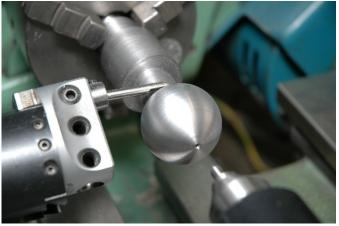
Finishing the Large Ball With Tailstock Withdrawn
